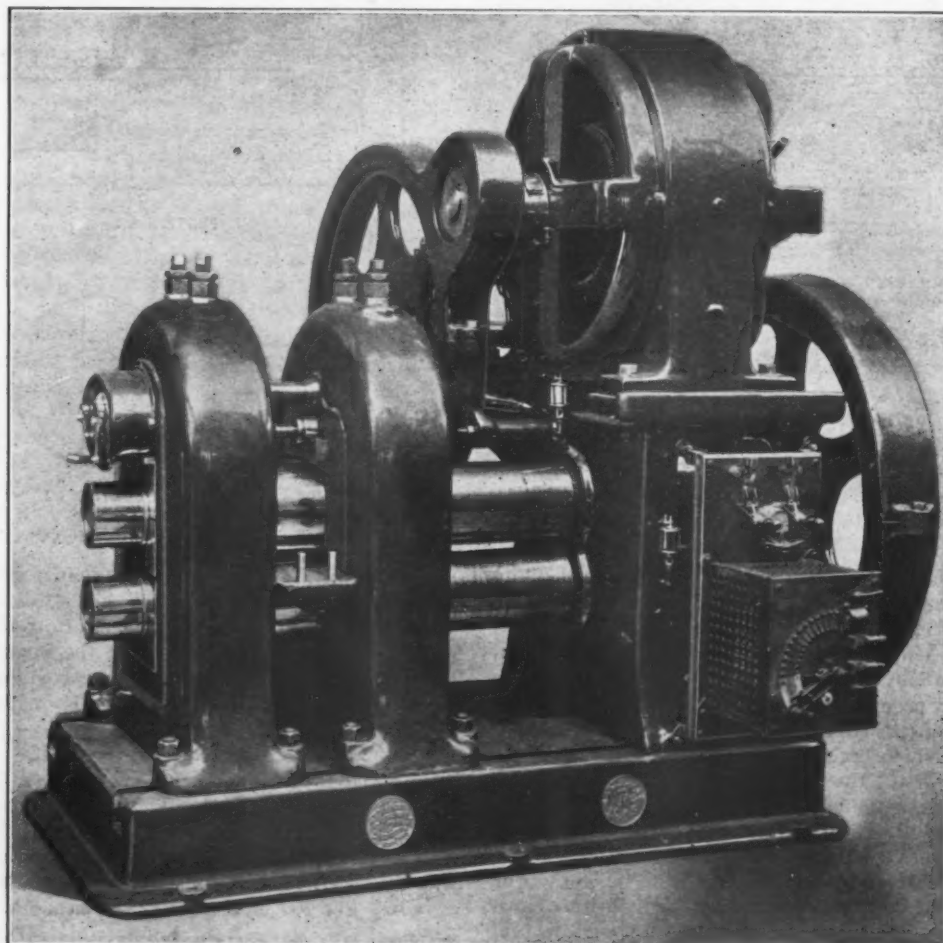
A Rolling Mill for Coin Metal Built by the Ferracute Machine Company, Bridgeton, N. J.
